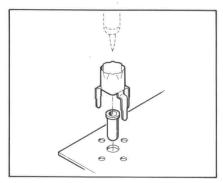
Typical ECB to Probe Tip Adaptor installation
